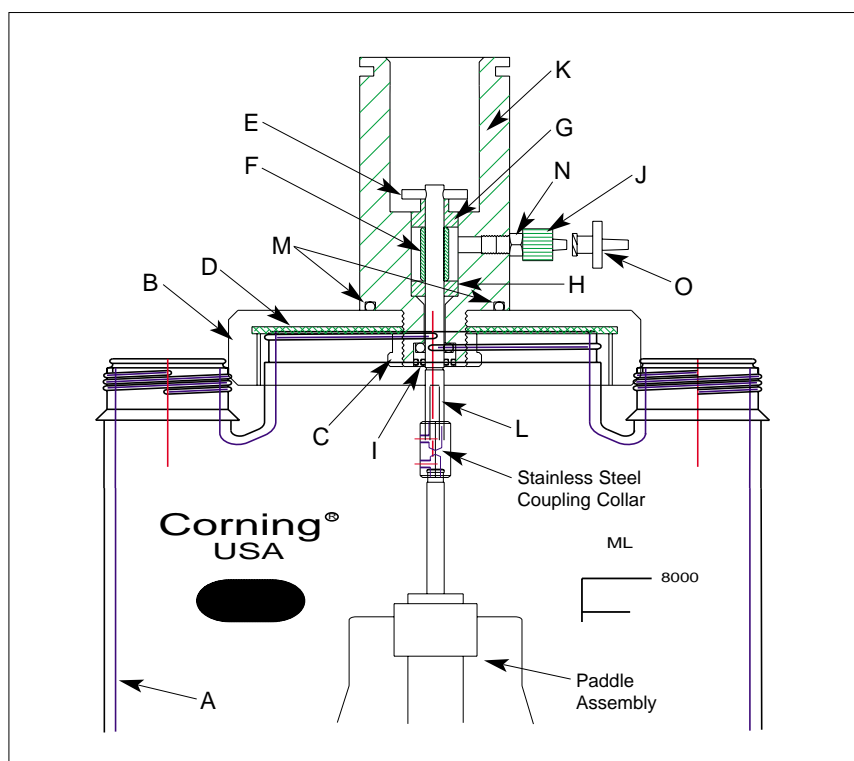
ProCulture® Direct Drive Detail, with 100/120mm Cap Assembly
